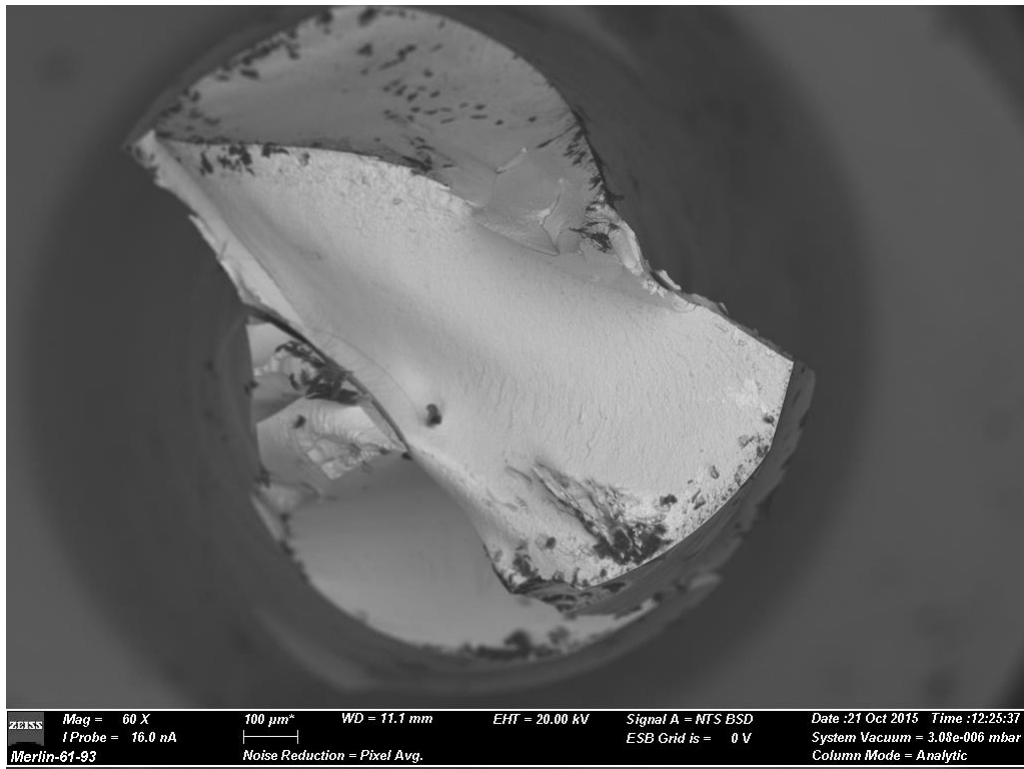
Experimental run 12: Tungsten carbide tool after machining with parameters $v_c = 75.4$ [m/min], $v_f = 768$ [mm/min] and $a_p = 125$ [μm]
